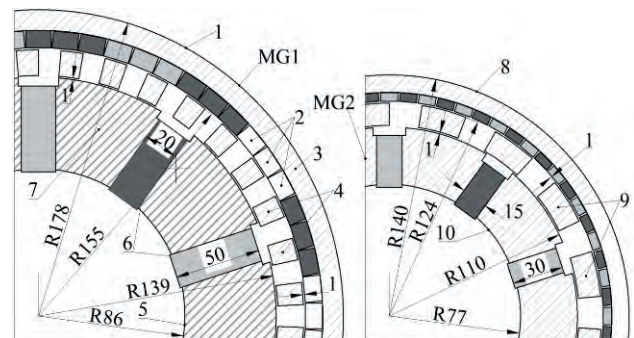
Magnetic system configuration of MG1 and MG2 gearboxes
